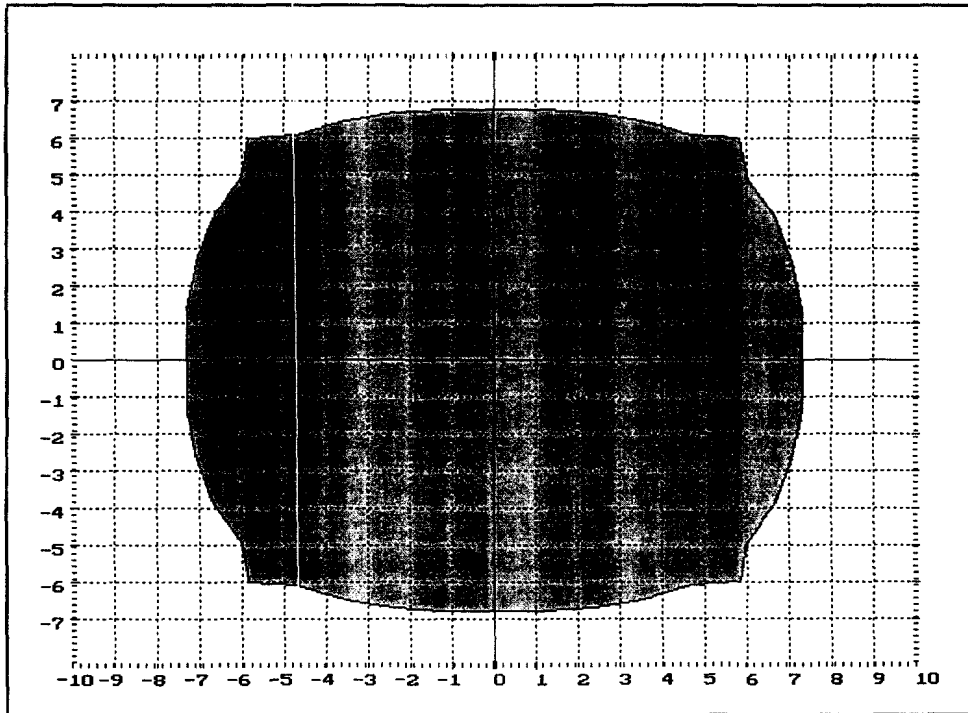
Calculated initial shape of the workpiece for the cylindrical part.
